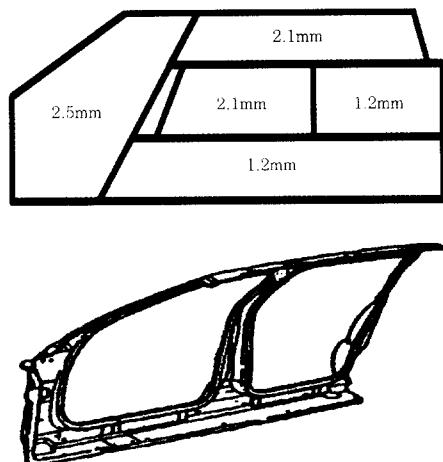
Cadillac body side frame using laser beam blank welding
